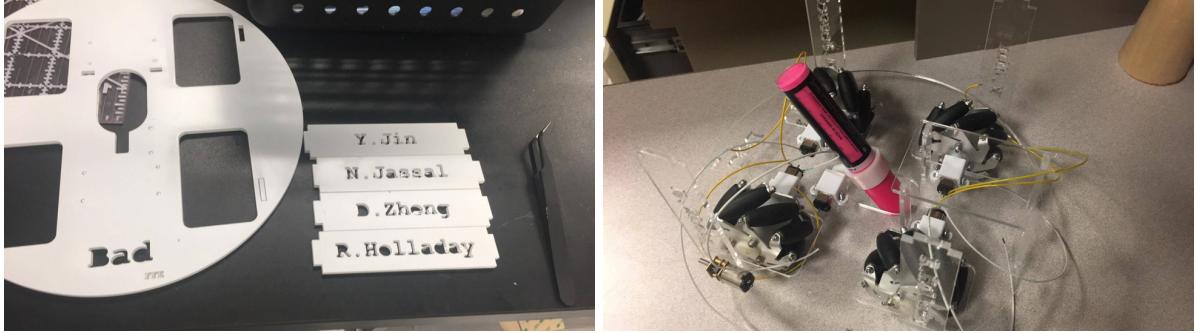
Laser Cut Chassis (left), Chassis Assembly (right)
